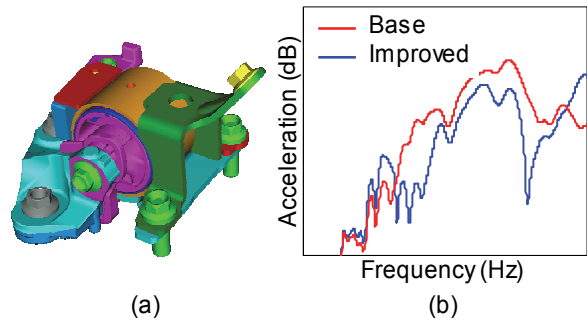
(a) Engine Mount and (b) Gear Noise Response of Engine Mount
